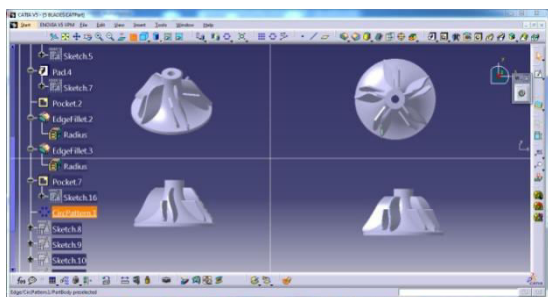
TURBOCHARGER COMPRESSOR 5 BLADES
